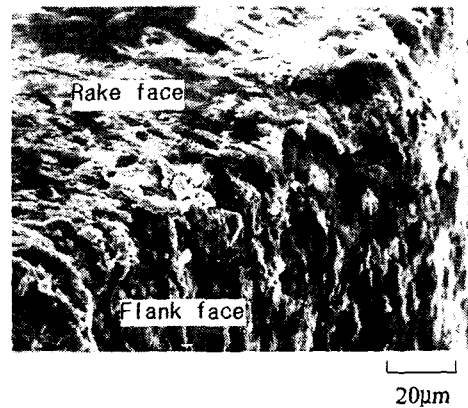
Typical wear patterns of alloy steel tools in dry machining of unsintered and presintered ceramics
